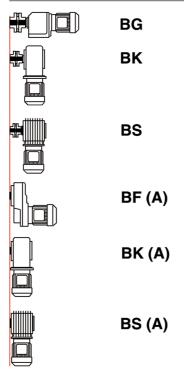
Shaft-mounted geared motor with hollow shaft
